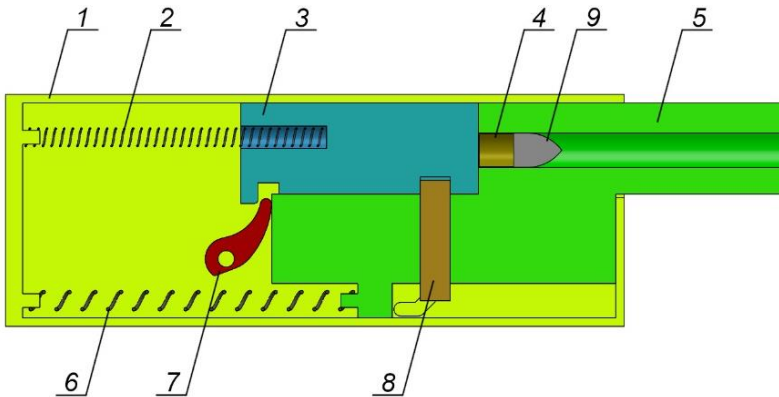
Structural diagram of the SRO firearm with an accelerator: 1 – receiver; 2 – bolt assembly recoil spring; 3 – bolt assembly; 4 – case; 5 – barrel assembly; 6 – barrel assembly recoil spring; 7 – accelerator; 8 – breech lock; 9 – projectile
